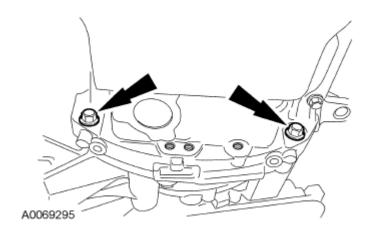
Locating Transaxle-To-Engine Bolts Courtesy of FORD MOTOR CO.
